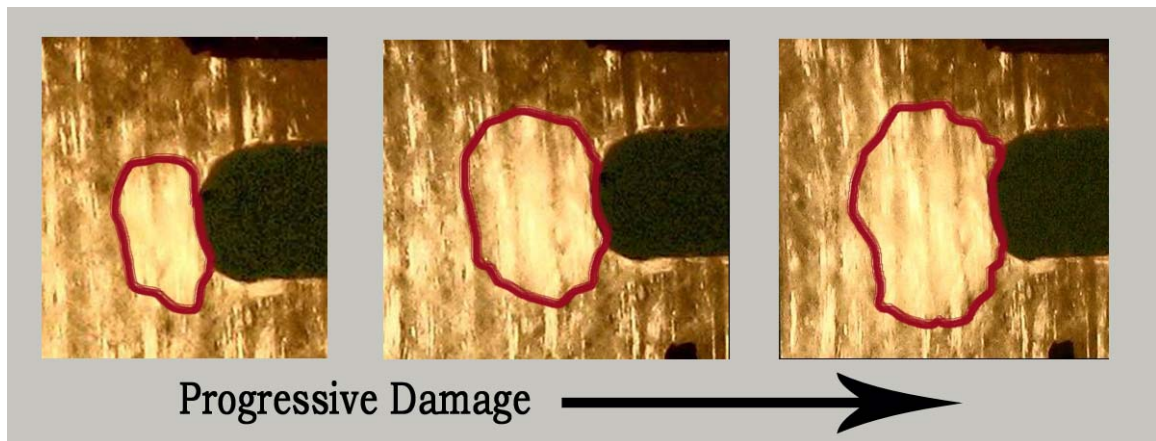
Contrasted photograph of E-glass/epoxy test coupon to illustrate the damage zone.
